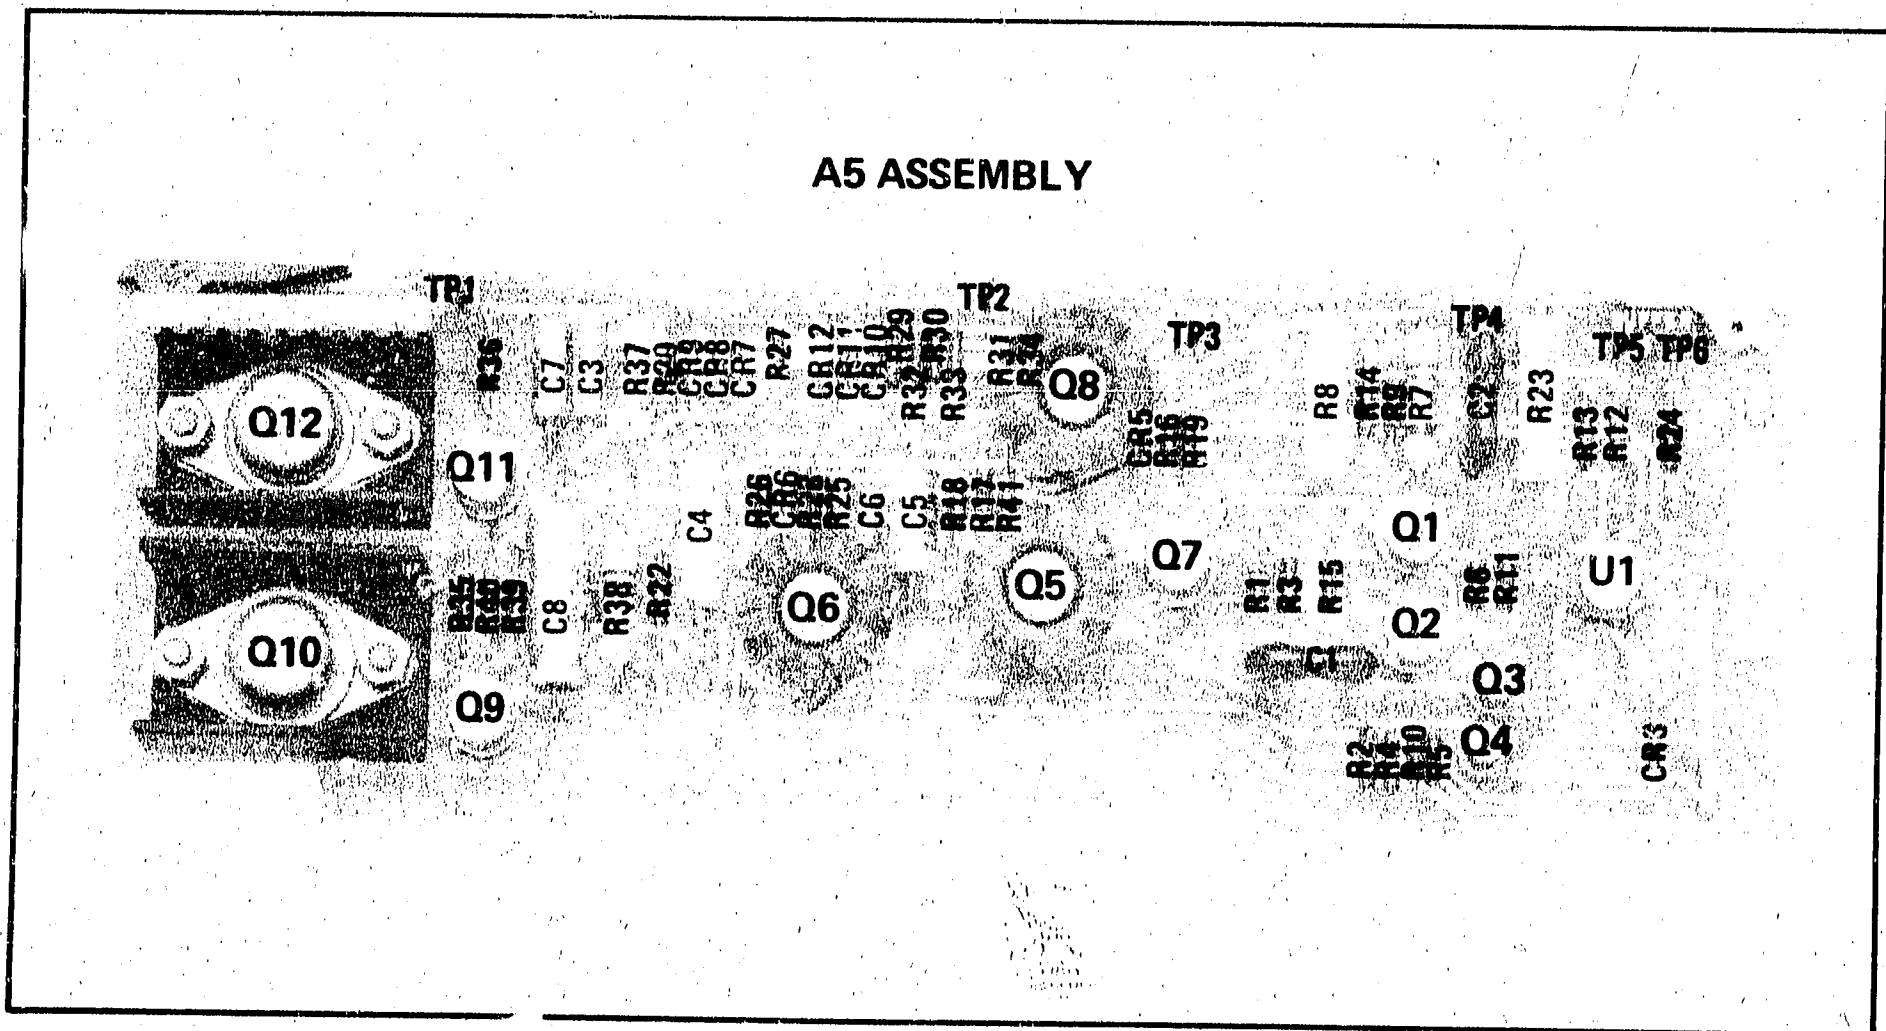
A5 FM Amplifier Assembly Component Locations
